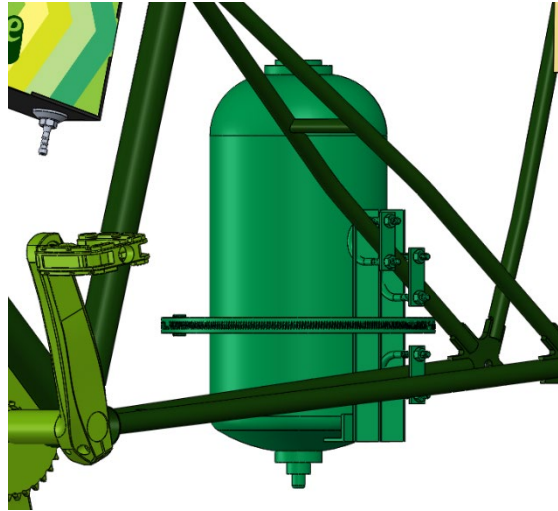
Final Design of Accumulator Mount Assembly with Vehicle Frame
